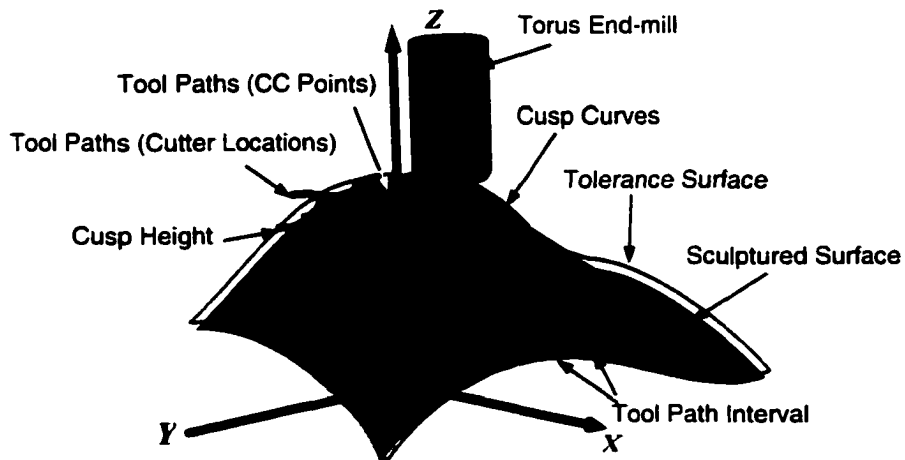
Iso-Cusped Tool Paths, Sculptured and Tolerance Surfaces
